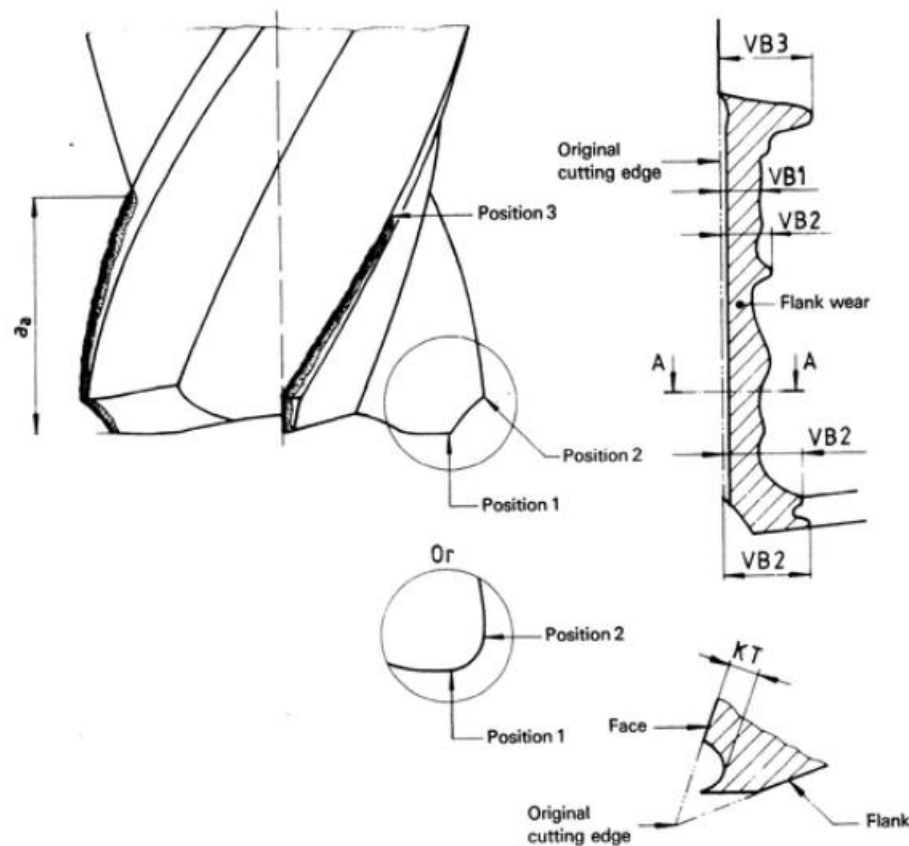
Types of flank wear on end-milling cutters. Reproduced from [119]
